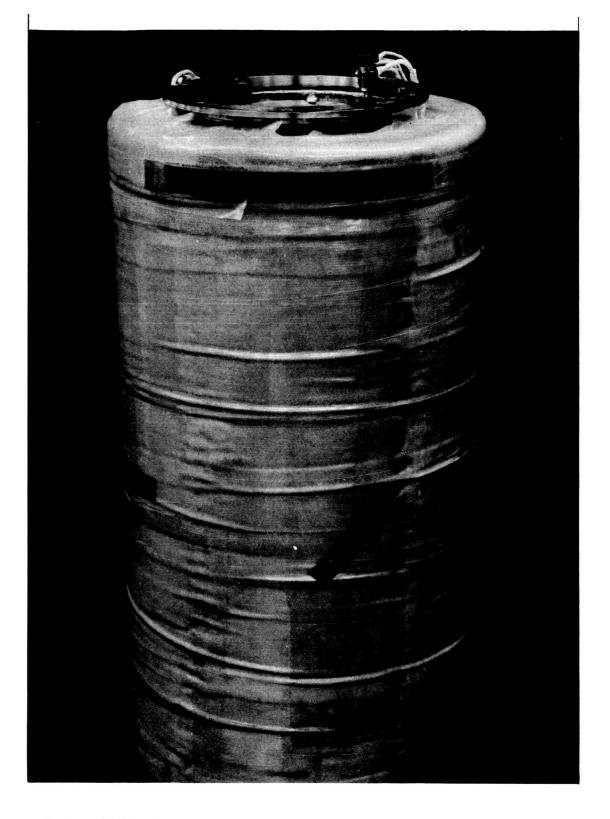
100-lb Thrust Chamber Assembly After Curing Fiber Glass Outer Wrap
